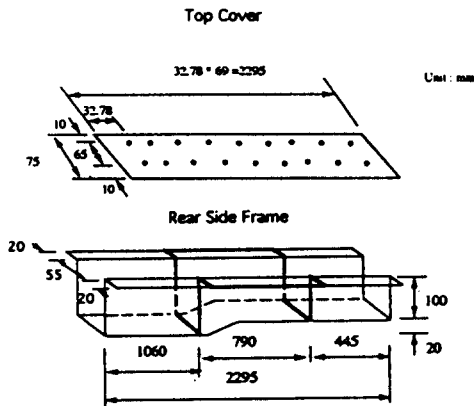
Geometry and dimensions of the laser welded underframe with different thicknesses.
